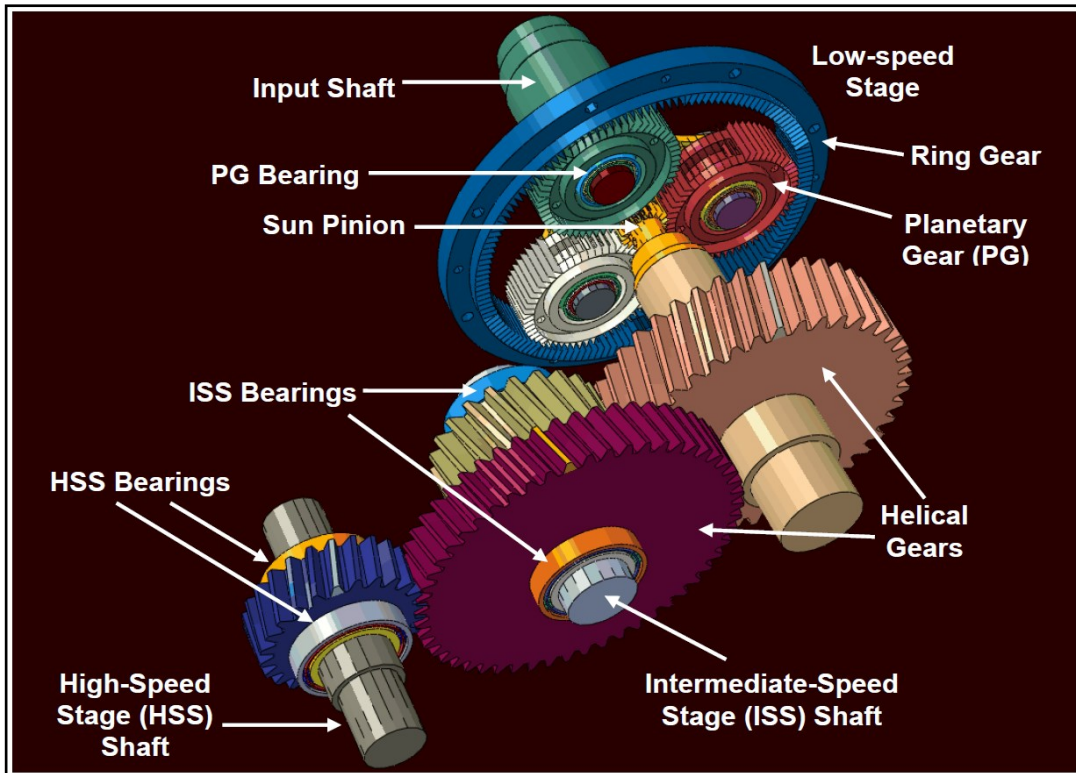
Schematic of a prototypical wind-turbine gear-box. The major components and sub-systems are identified. Failure typically occurs within the (planet, intermediate-speed shaft and high-speed shaft) roller-bearings.
